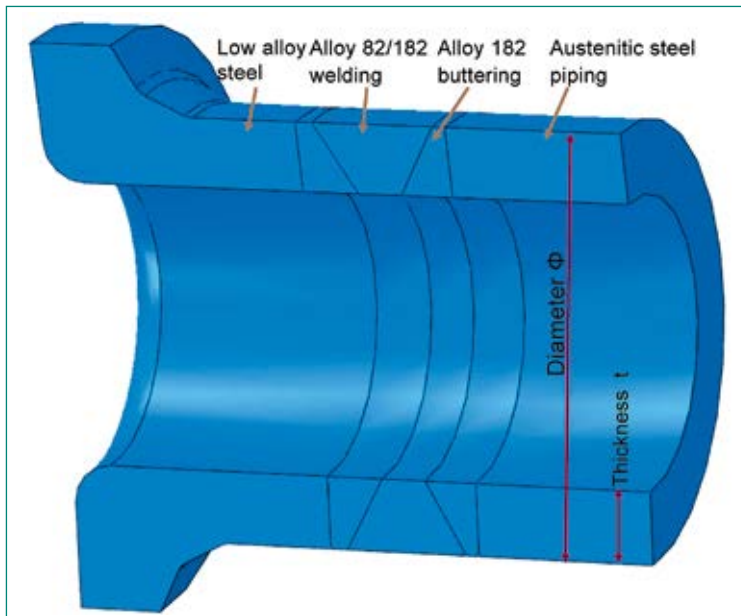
Nuclear nozzle with dissimilar welding.
